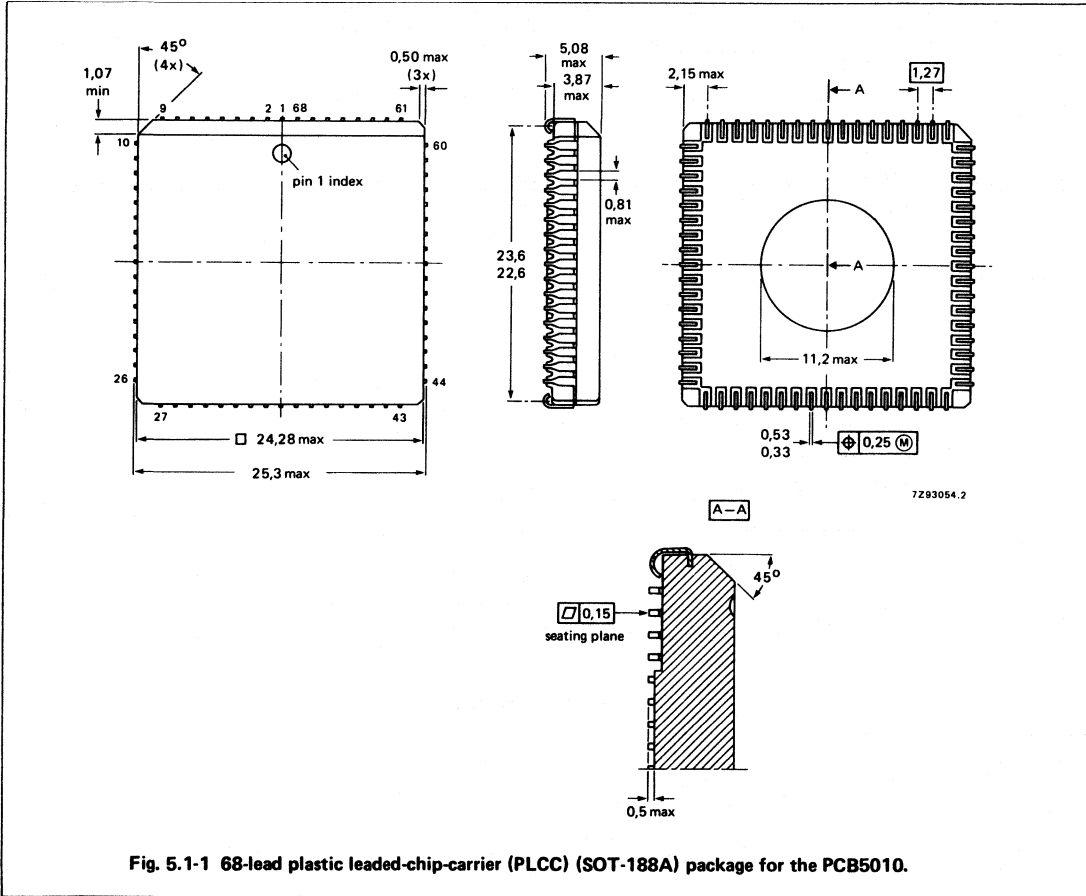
68-lead plastic leaded-chip-carrier (PLCC) (SOT-188A) package for the PCB5010.
